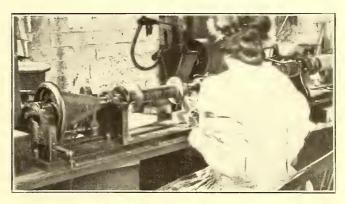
Boston Elevated Shops—Winding Machine for Track Switch and Other Coils
